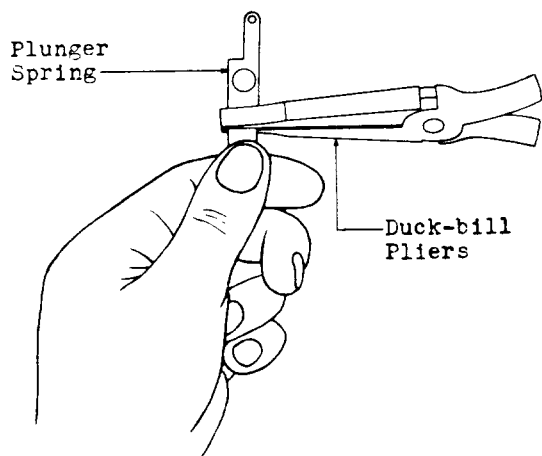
Method of Adjusting Plunger Springs of 69, 183, 242, 508, 521 and 539 Type Keys
